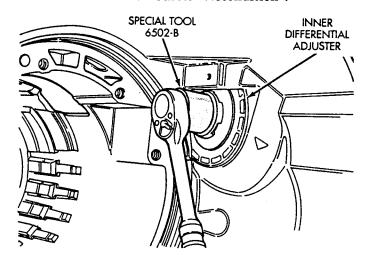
Remove Inner Adjuster By Turning Clockwise
